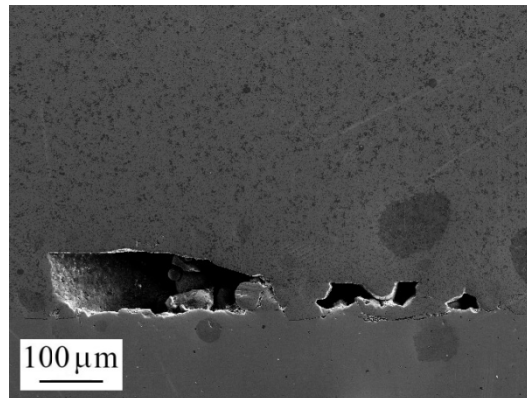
Welding defects in the fusion line of a deposit welded with welding parameters C
